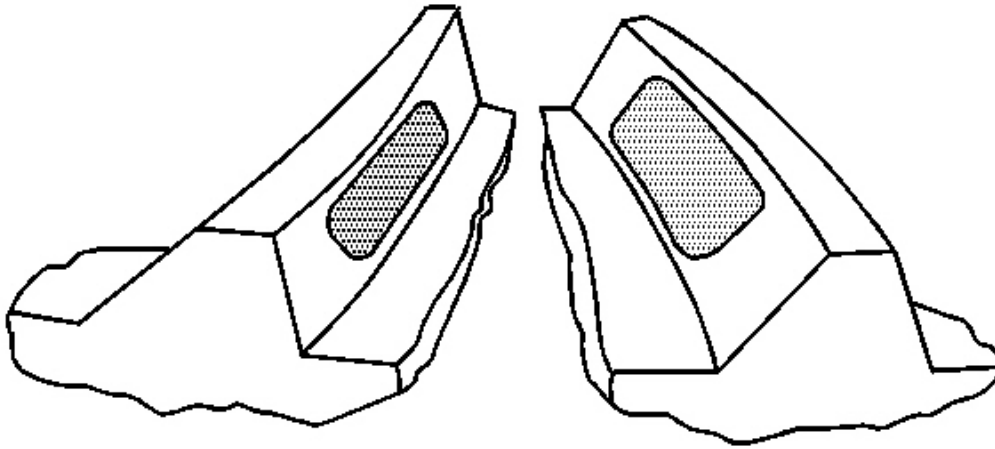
Identifying Correct Gear Tooth Contact Pattern
